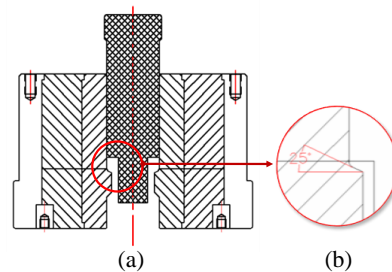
Modeling of forward extrusion helical gear die : (a) Die set of helical gear, (b) Inlet angle of tooth from center axis
